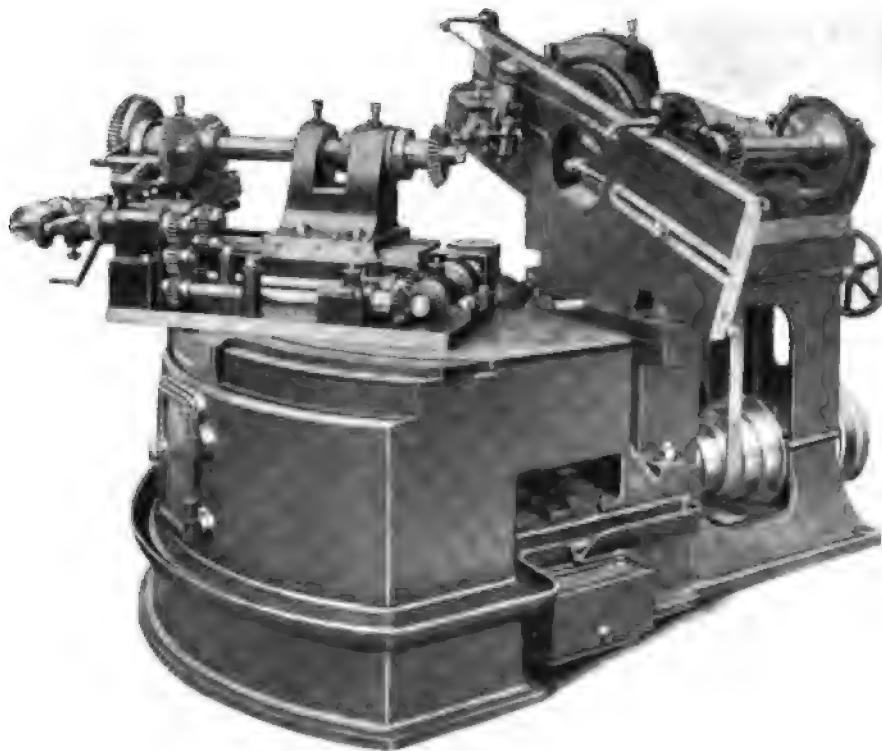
MONNERET BEVEL GEAR GENERATOR.
